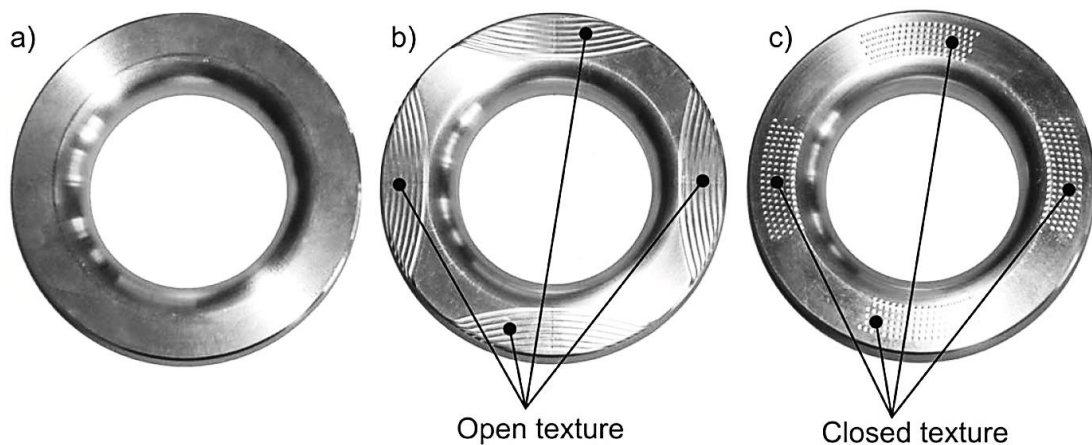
Deep drawing die manufactured with a) non-textured, b) open lubricant pockets and c) closed pockets [57].
